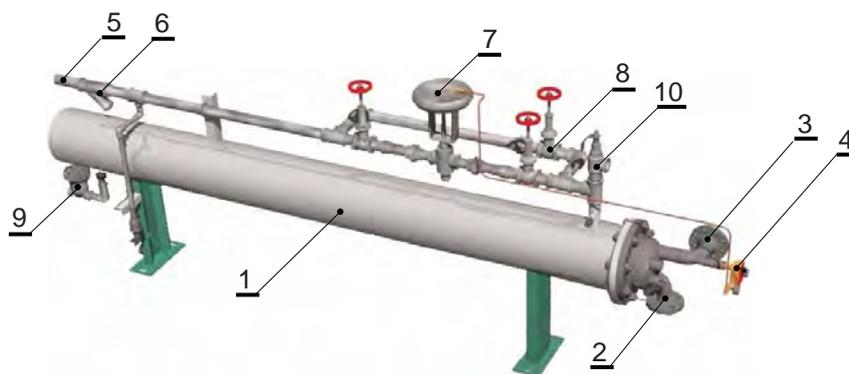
Liquefied gas vaporiser 1 - casing; 2 - liquefied gas inlet; 3 - liquefied gas outlet; 4 - gas temperature sensor; 5 - heating steam inlet; 6 - filter; 7 - heating steam inlet controller; 8 - heating steam inlet manual control valve; 9 - heating medium outlet with steam trap; 10 - safety valve
